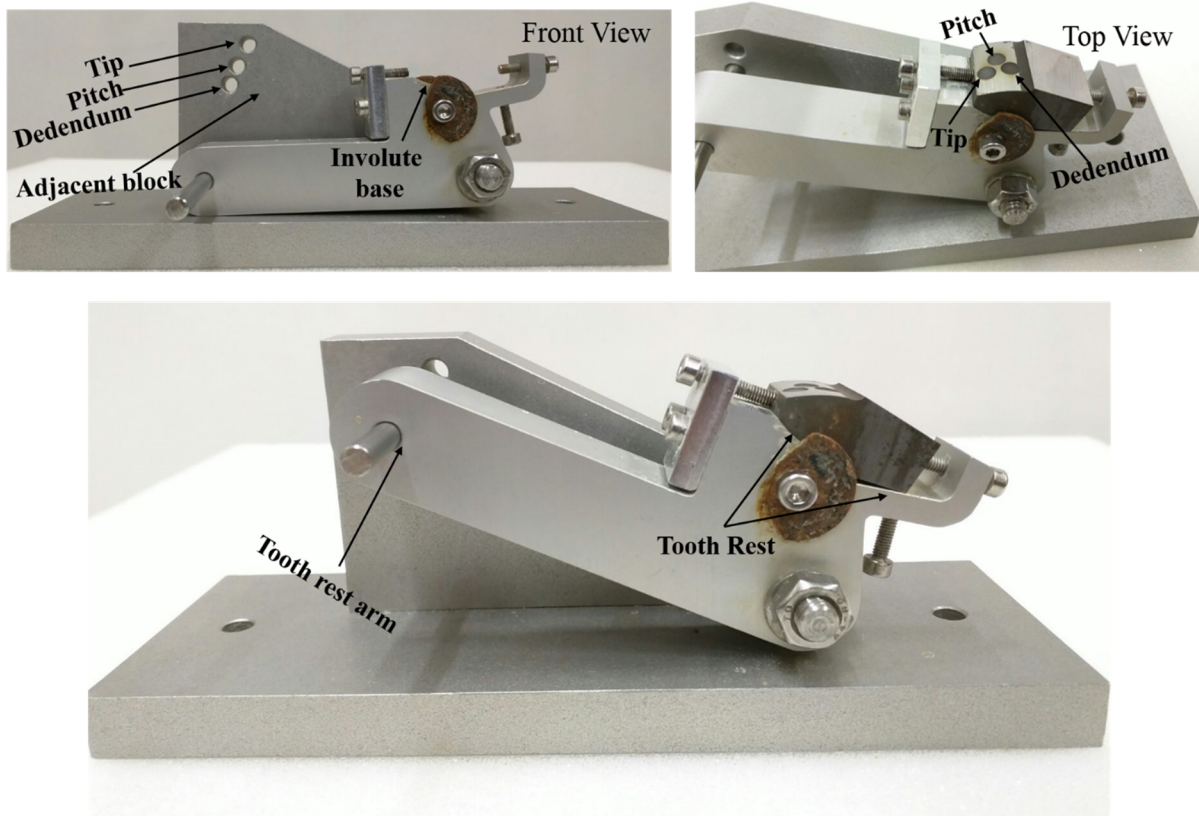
Specially designed tool holder for etching involute gear tooth (developed in this thesis study).
